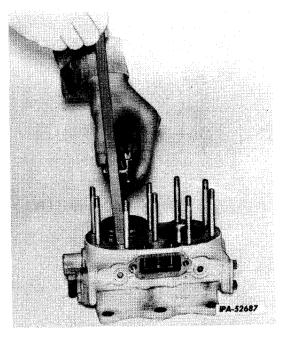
Checking Piston and Cylinder Bore Clearance.
